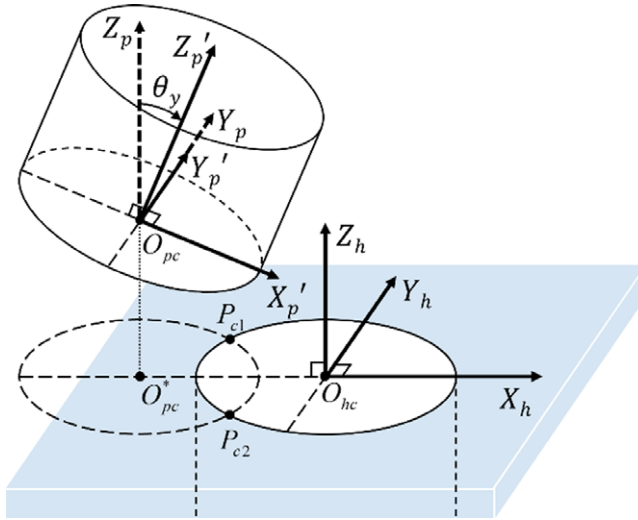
Mathematical model of two-point contact in the cylindrical parts assembly.
